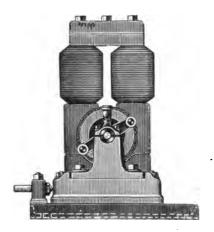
ELECTRIC MOTOR OR DYNAMO. Elwell-Parker Pattern.
